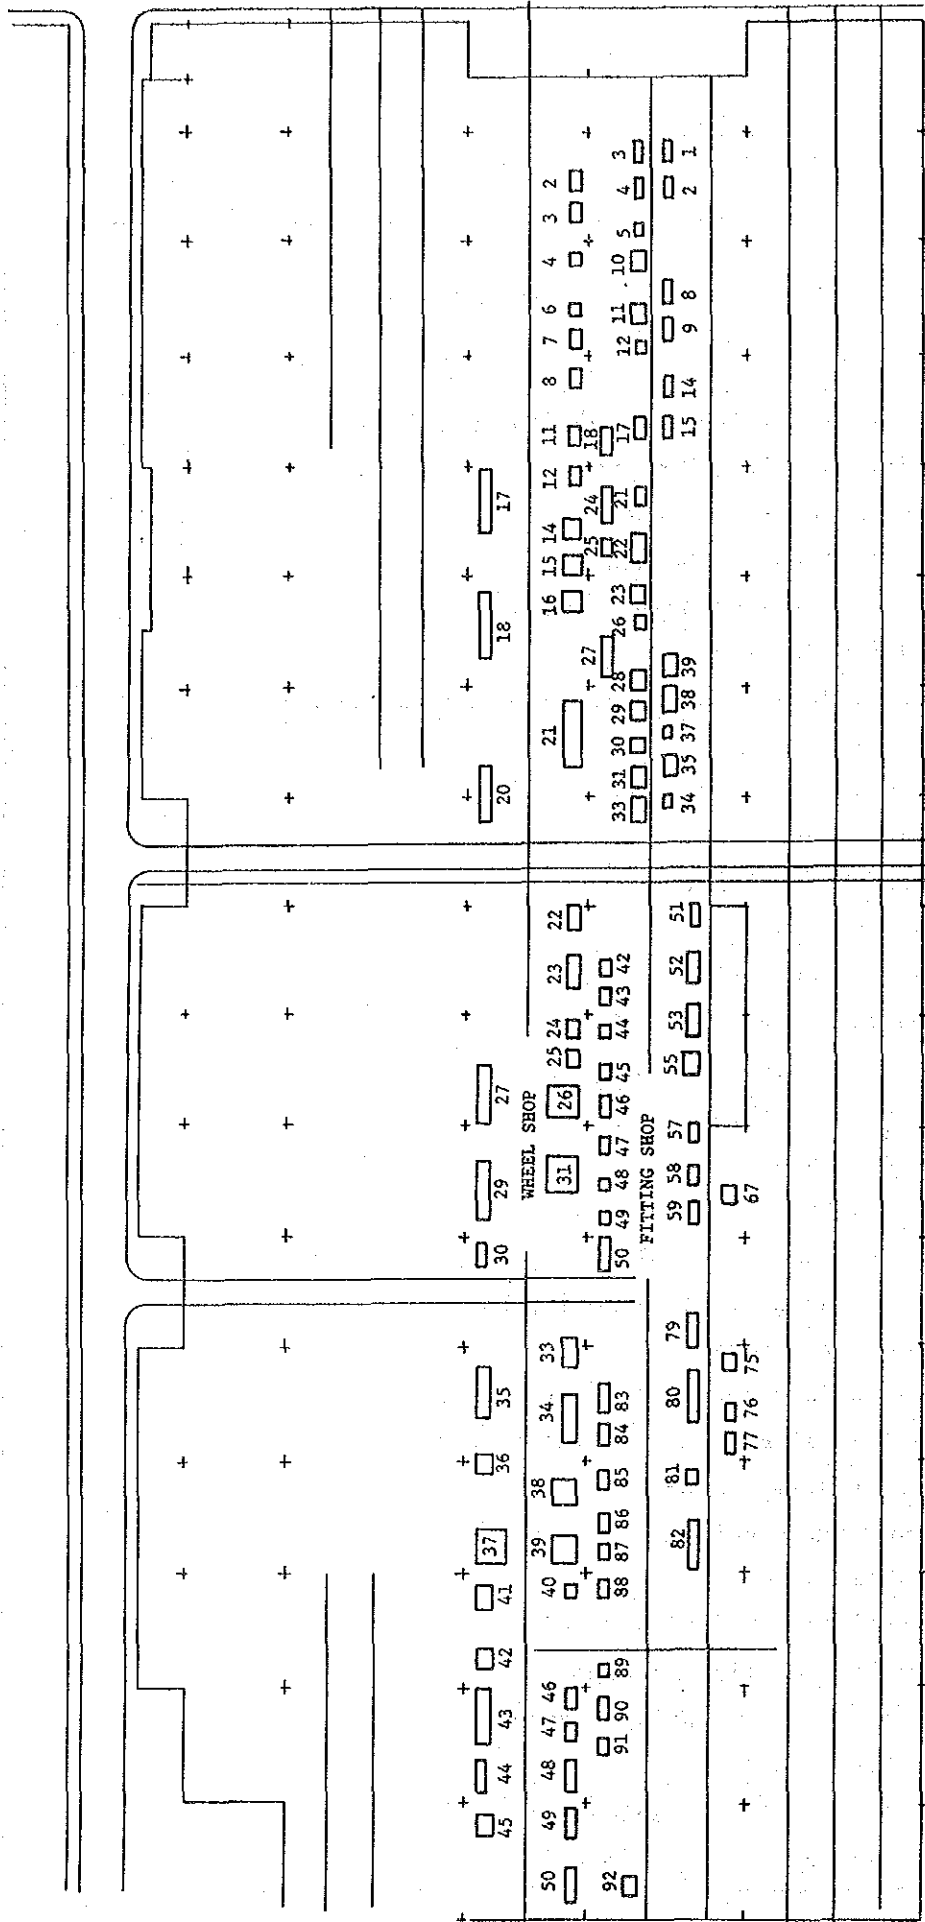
Existing Layout of Machines Inside Wheel & Fitting Shop
